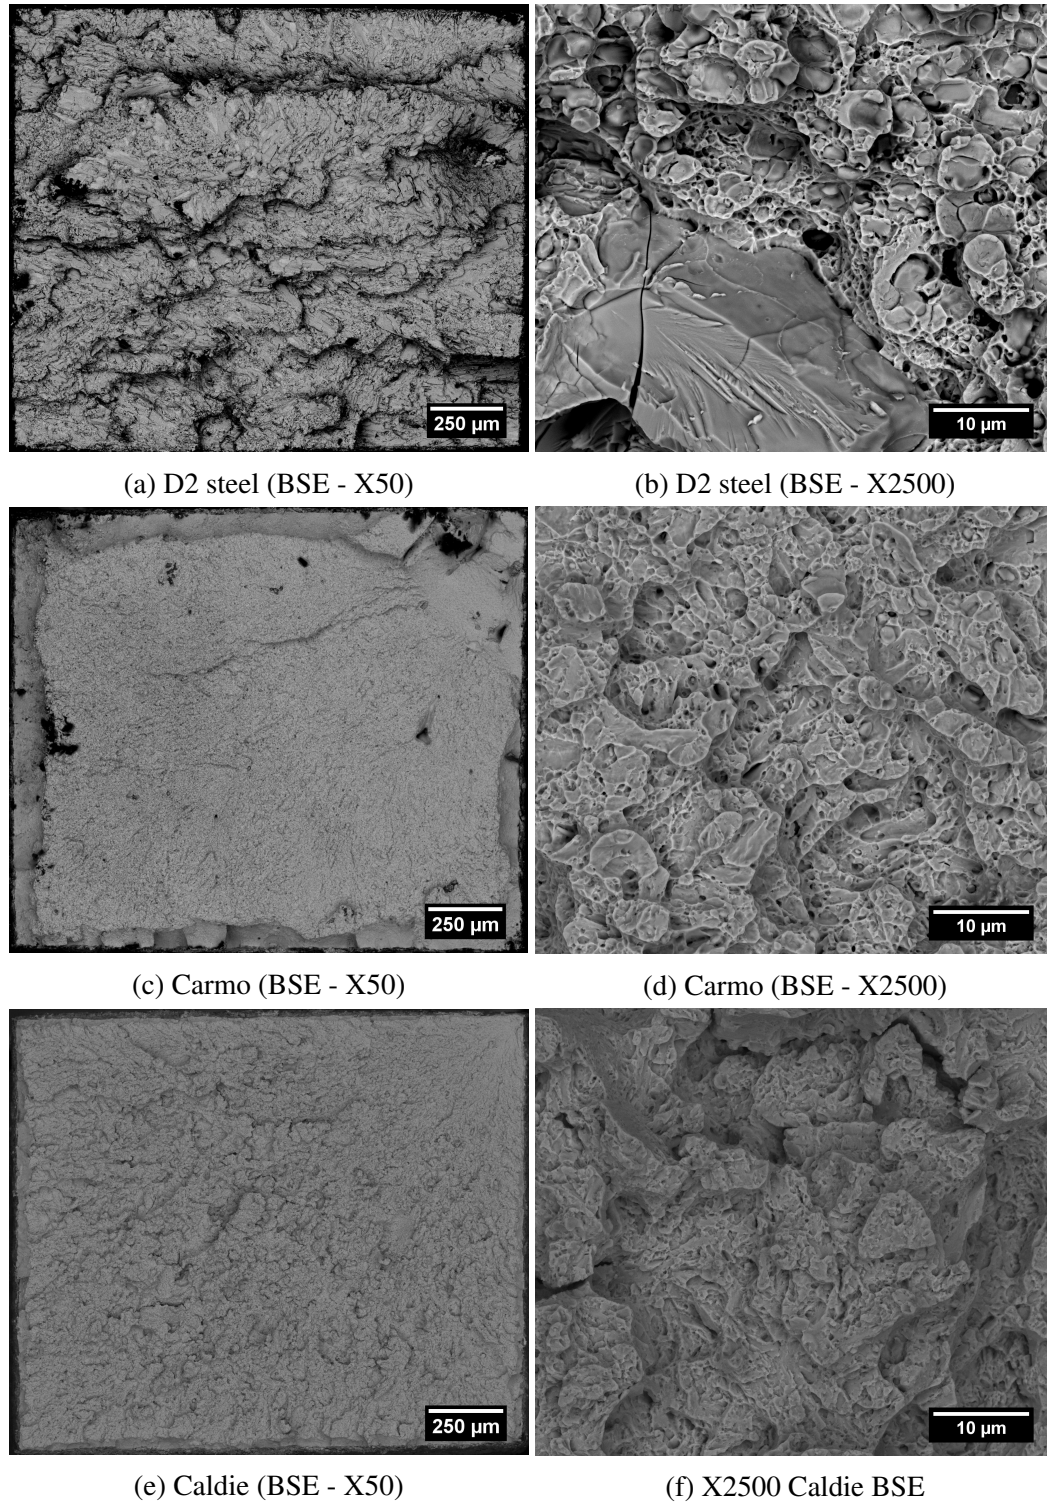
SEM images of fracture surfaces on specimens tested in tension
